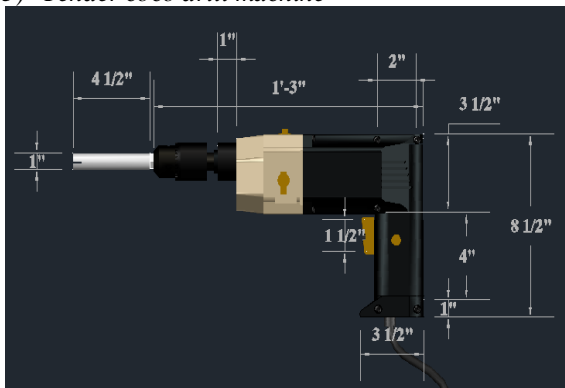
Side view of Tender coco drill machine AUTOCAD
